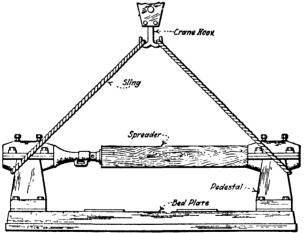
Lifting a bedplate by placing slings under the ends of the bearing pedestals and inserting a spreader and screw jack between the bearings.
